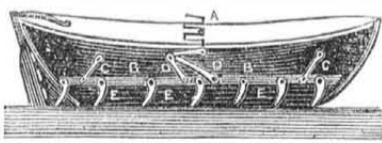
is a horizontal view. Fig. 2 is a side view. The same letters refer to like parts.
